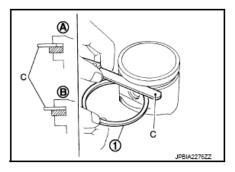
Checking Piston Ring Side Clearance Using Feeler Gauge Courtesy of NISSAN NORTH AMERICA, INC.
